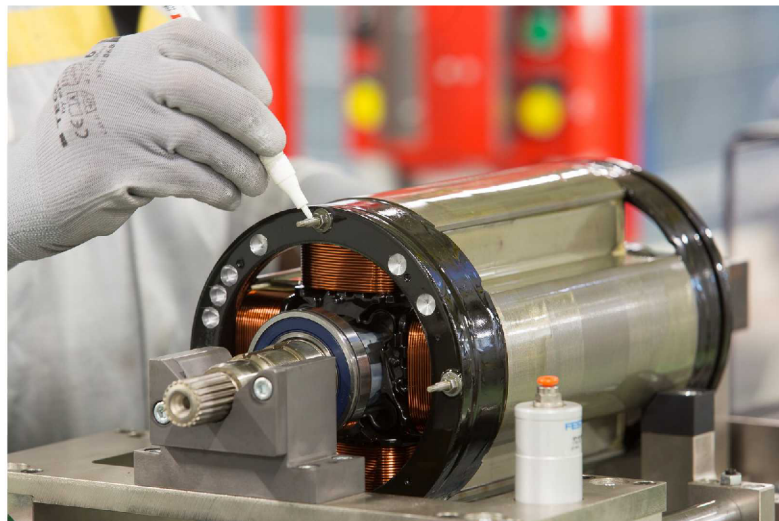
Complete rotor of Renault R240 motor. Reprinted from [20].
